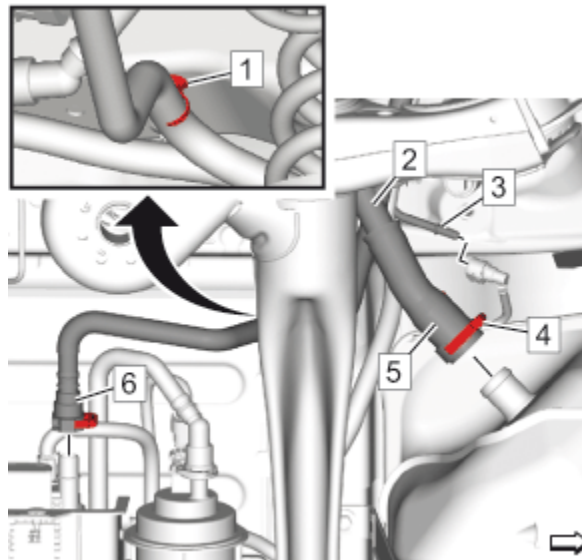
Evaporative Emission System Vacuum Leak Pump Filter Pipe, Fuel Tank Filler Hose, Vent Pipe, Clamp And Retainer
